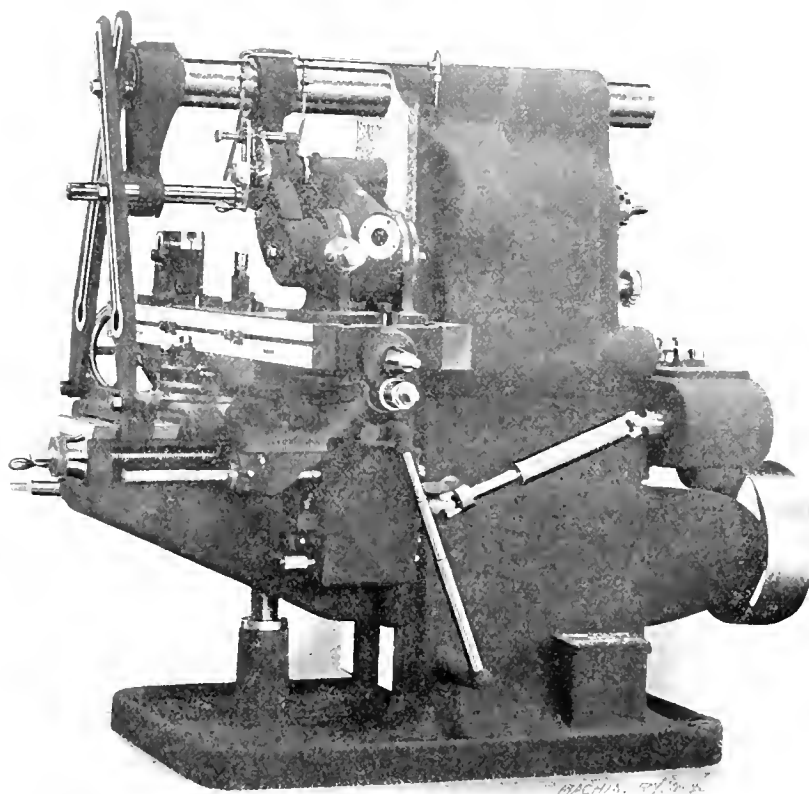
Side View of Milwaukee Universal Milling Machine.
